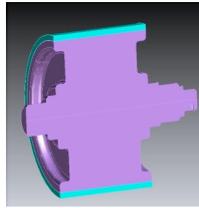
Variant F1₂₇ – One-piece shaft, with the front channel + cylinder wear
